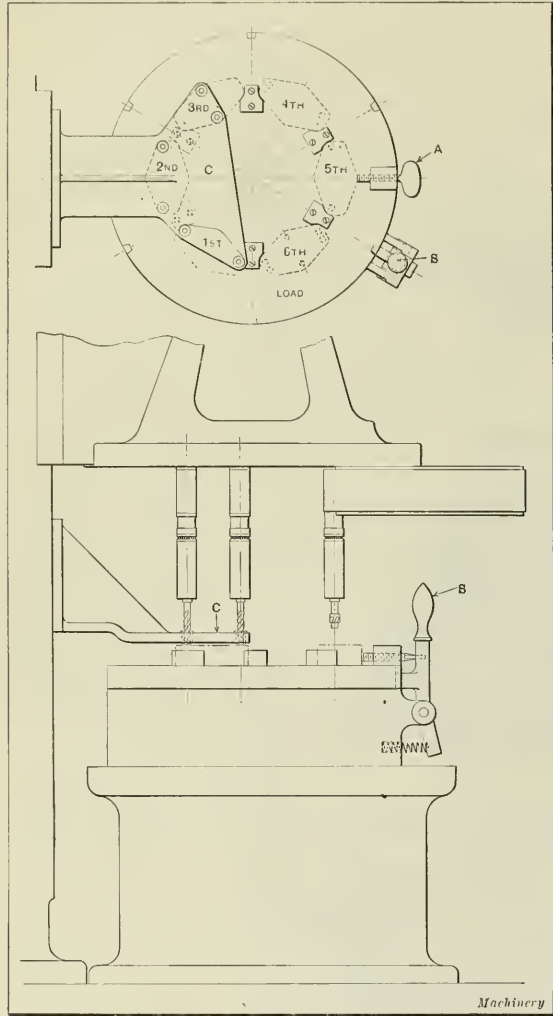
Indexing Table with Six Stations in Use on Multiple-spindle Drilling Machine
